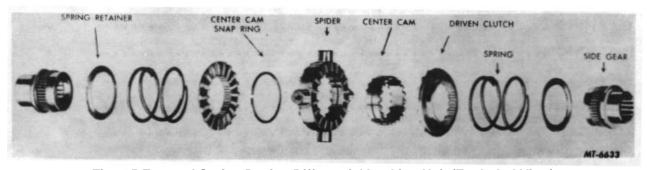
External Spring Design Differential Locking Unit (Exploded View)
